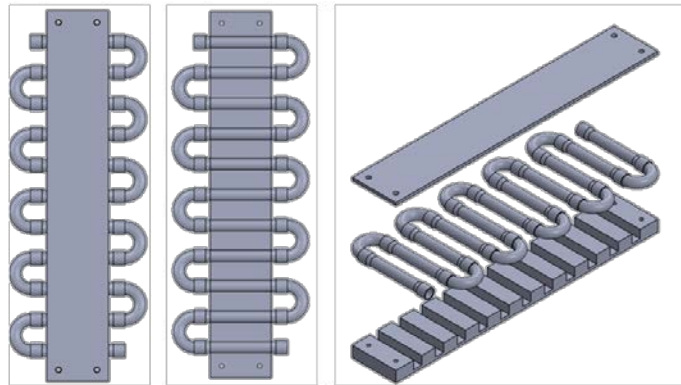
3D model of the test section with bonded U-bends and fixture plate.
